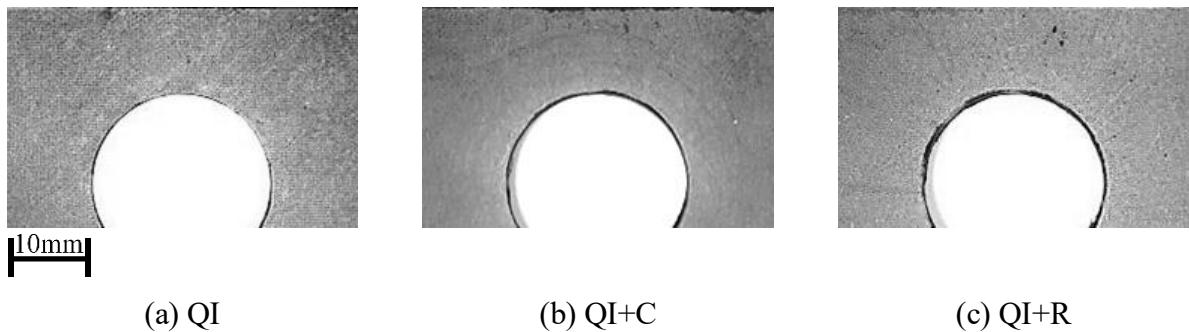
Macroscopic failure of the specimens at the initial bearing strength, S_{mi} ($e/d=1$)
